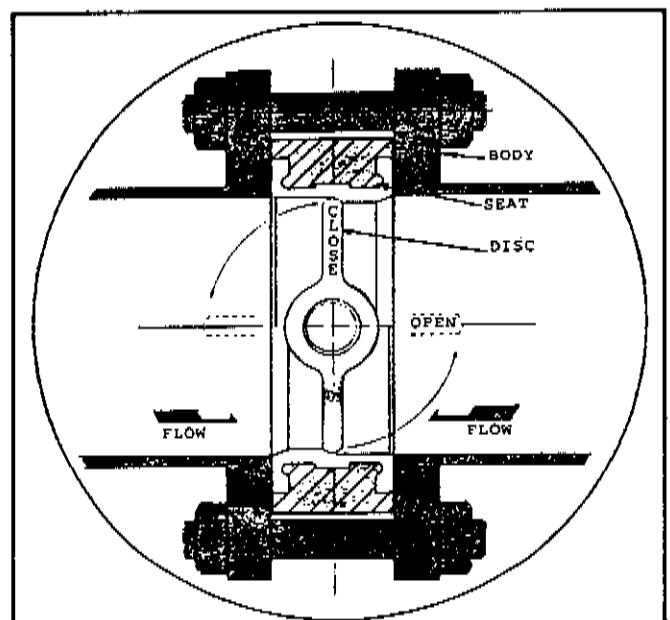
A typical rubber-seated butterfly valve (wafer style).
